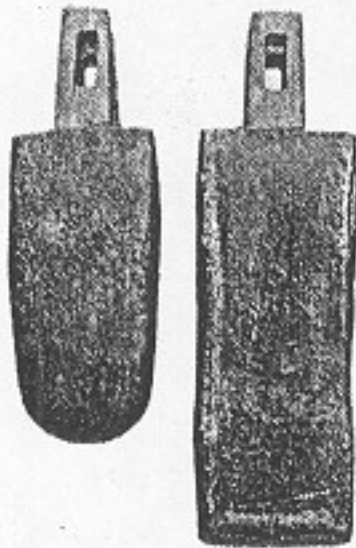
Before and after pictures of dipper teeth repaired by welding.
